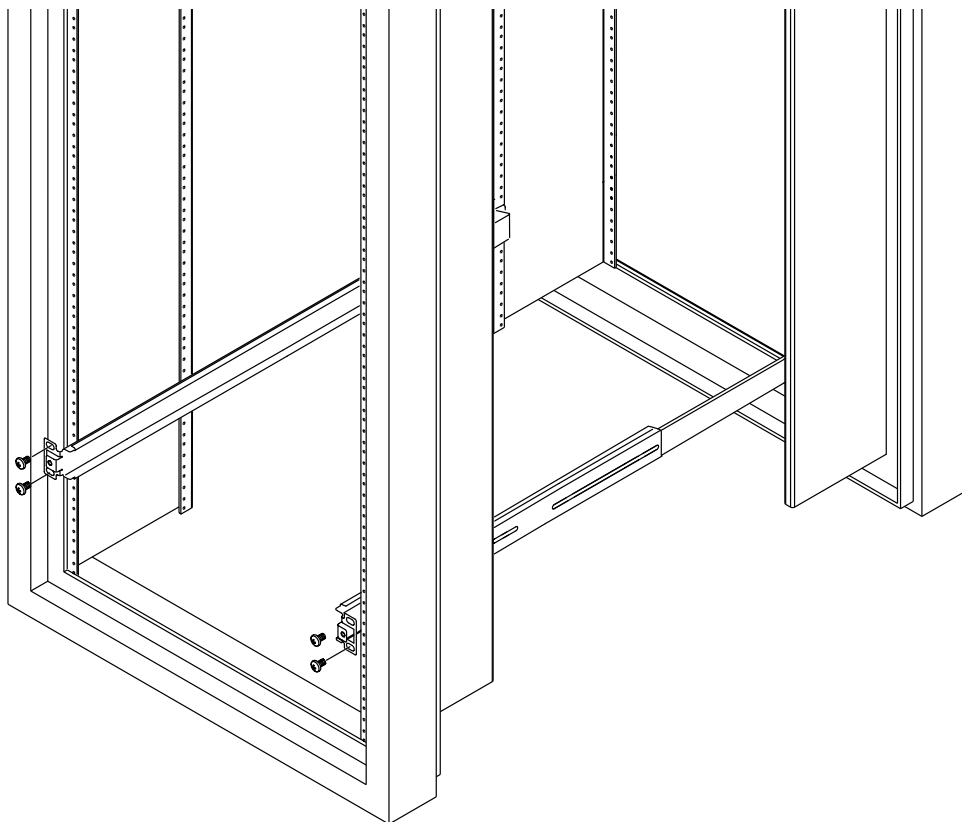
Fixing Slide Mounts in Sun 72-inch Expansion Rack – Front View (side panels removed for clarity)
